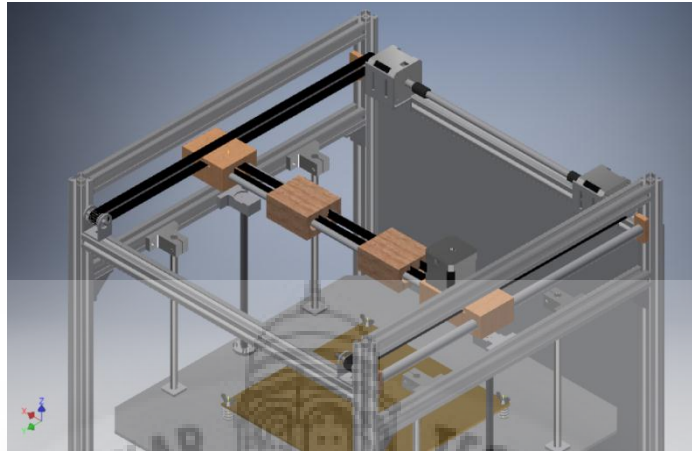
Chrome Plated Shaft Arrangement in CAD.
